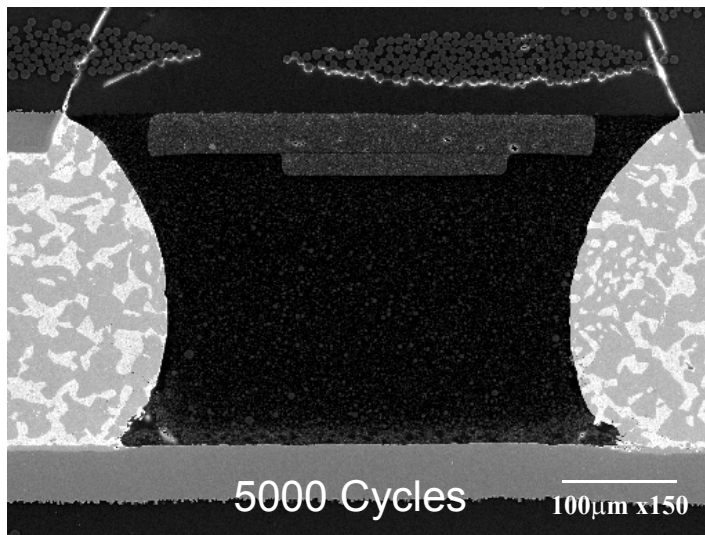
Failure Mode for Underfilled BGA Substrate Cracking with Solder Extrusion to Cause Shorting
